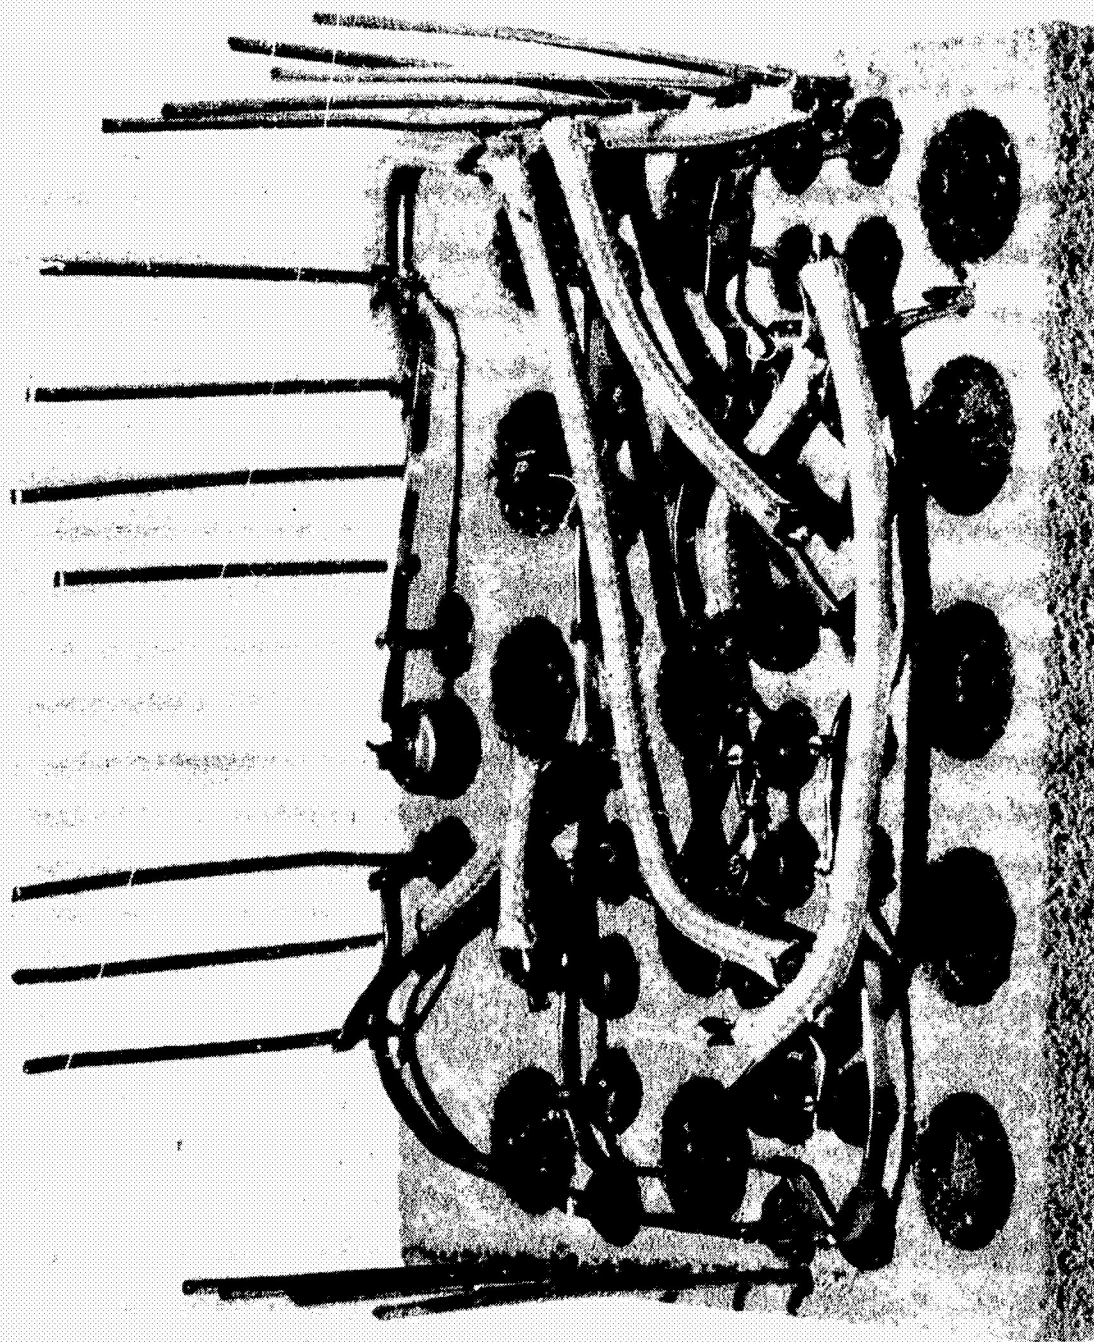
Syntactic foam component holder and welded circuitry.
